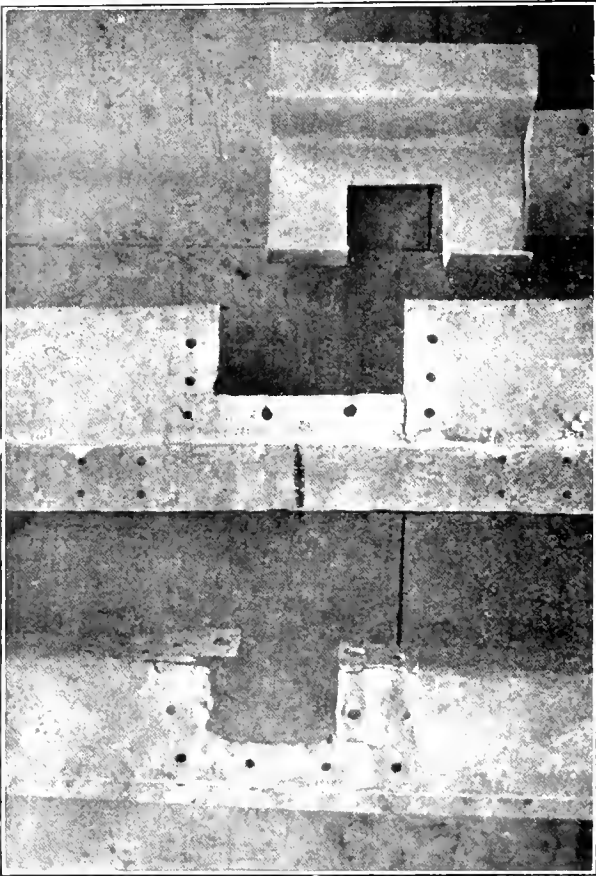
DAMAGED END SILLS AFTER BEING STRAIGHTENED; ALSO THE REINFORCING PIECE FOR THE CENTER.
